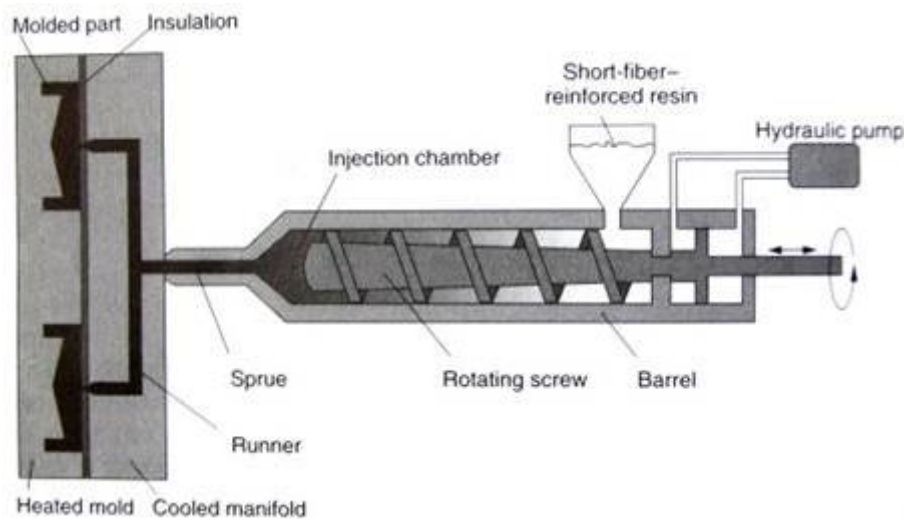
Injection molding of short fiber reinforced composites. The short fiber reinforced resin/pellets are fed in the injection chamber. After the material is forced to enter and fill the heated mold, the part then solidifies and is ready to be demolded [136].
